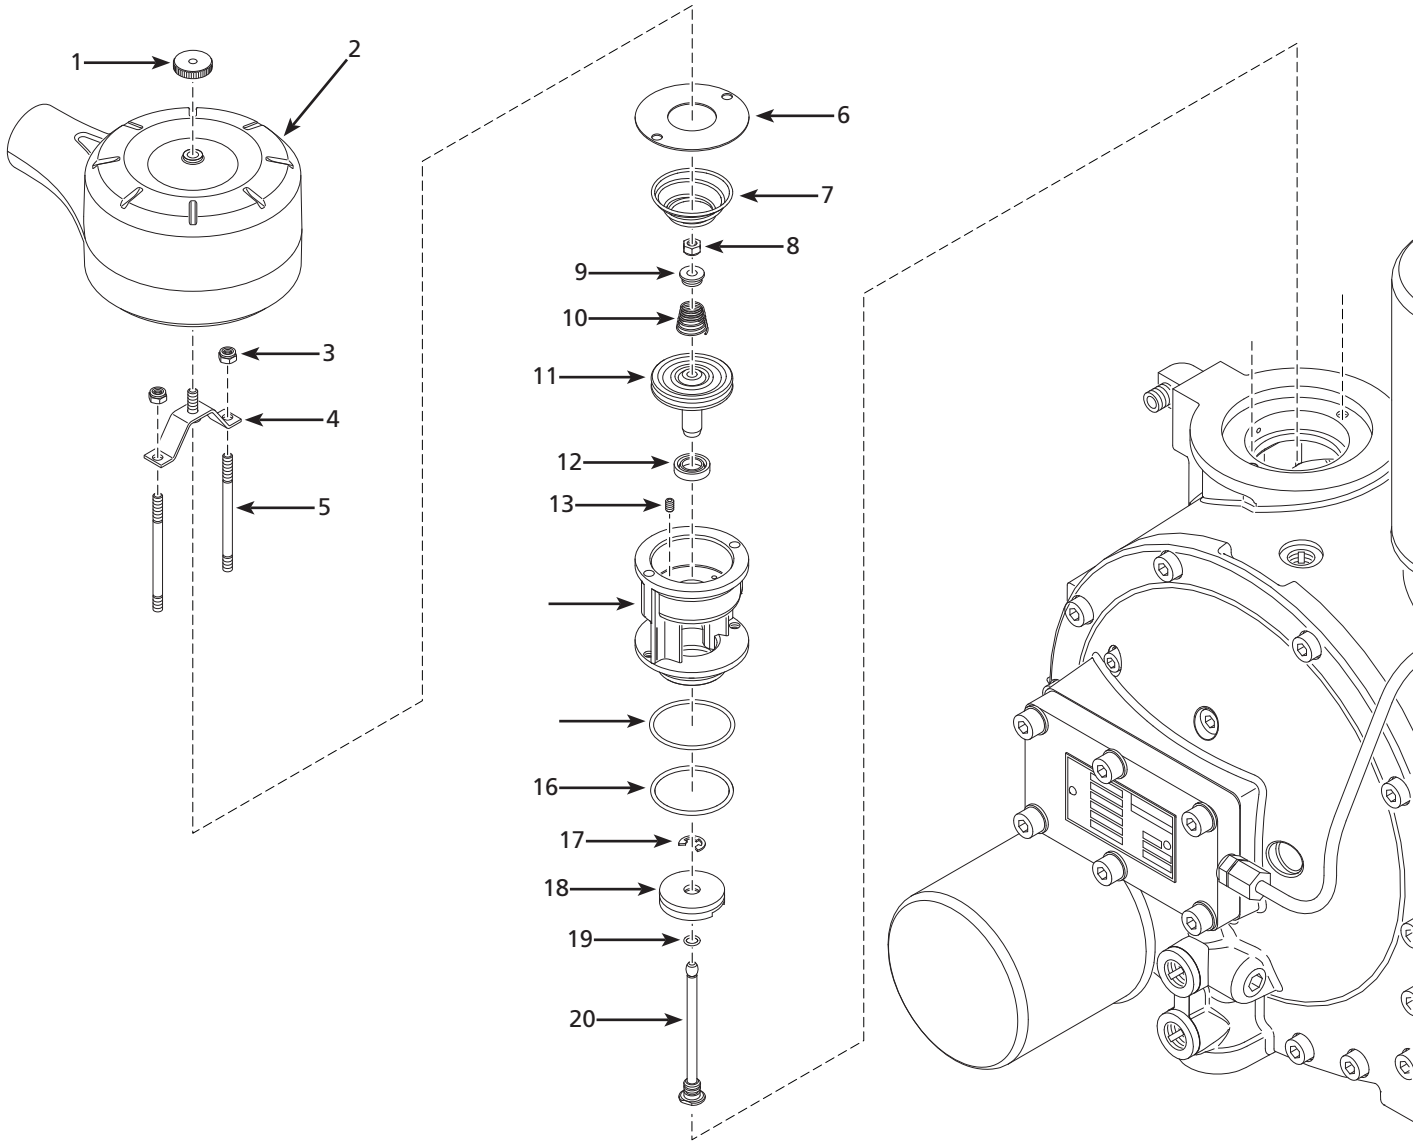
Repair Parts Illustration for 5 HP - 10 HP Rotary Screw Intake Assembly
